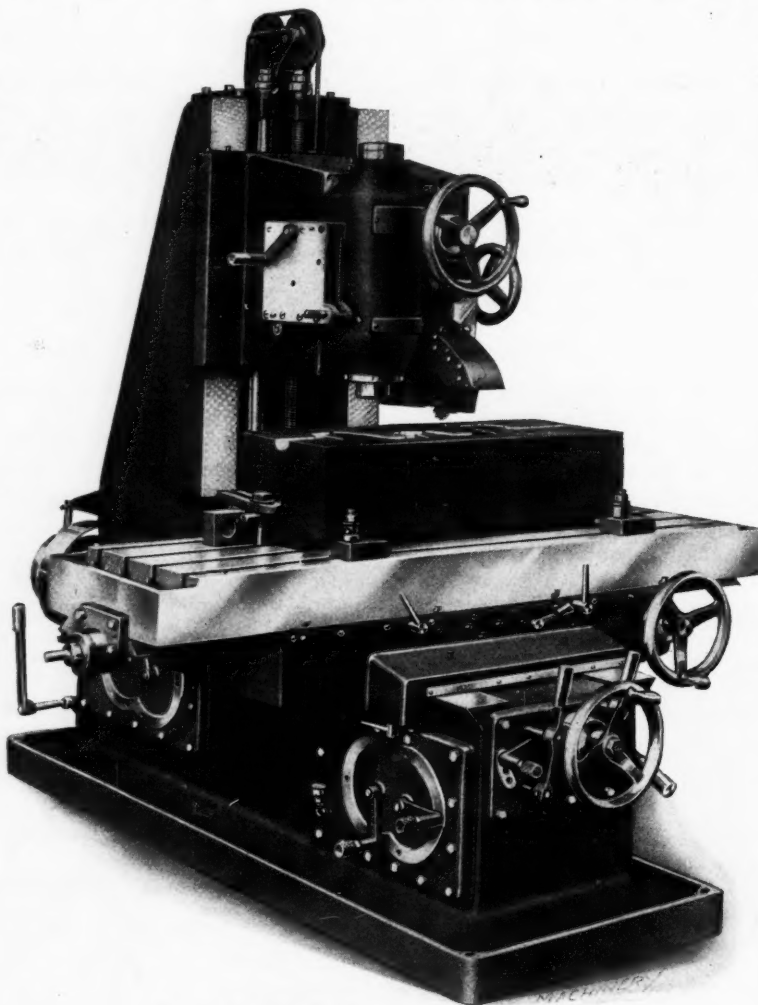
Jackson No. 8 Duplex Die-sinking Machine
